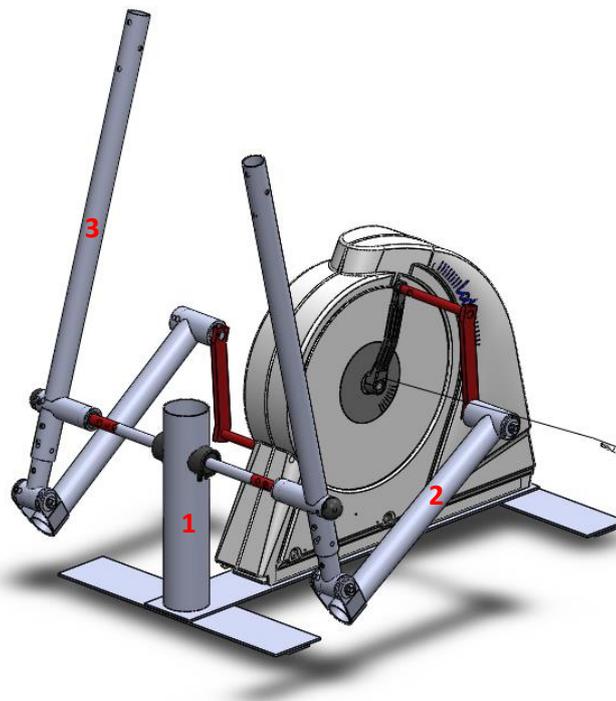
The almost end design of the prototype drawn in SolidWorks. The parts indicated by 1 to 3 have been modified, their old shapes can be seen in Figure 50. The red parts are newly created parts for the prototype.
